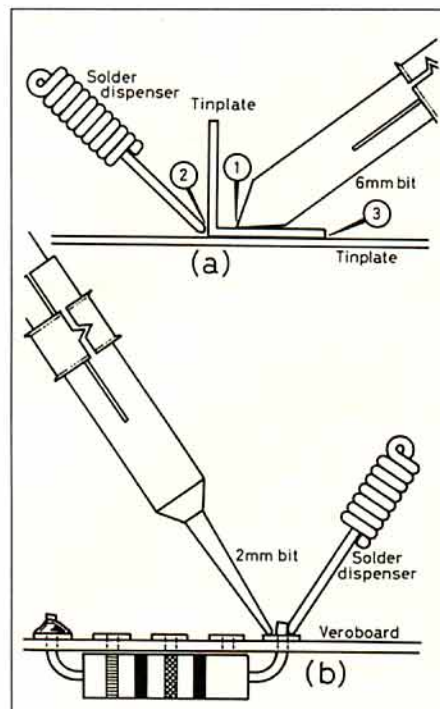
(a) Using a large bit to solder tin plate; (b) Using a small bit for components. Note the handy solder dispenser.
